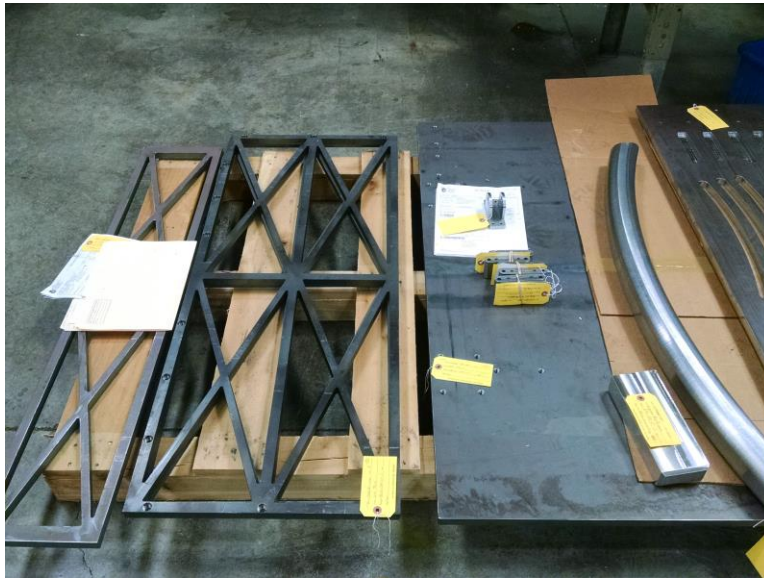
Bottom and Back Panels, Rod - Reaction Rod Assembly
